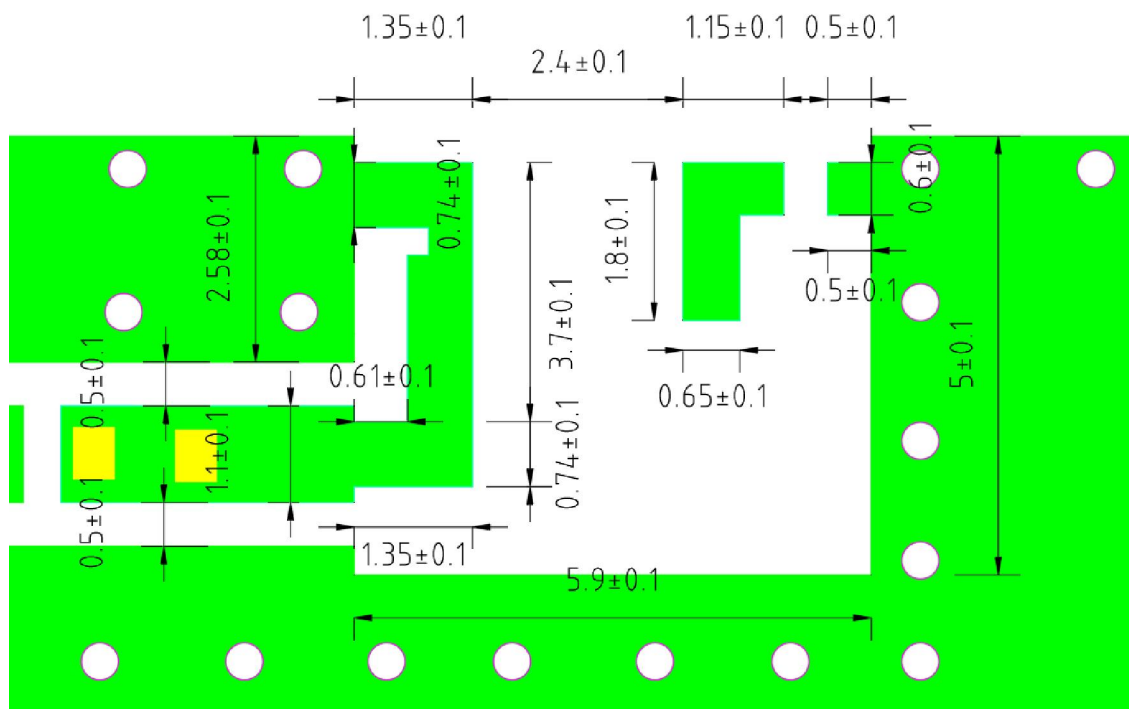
MAN2450C32 PCB Layout (Unit: mm)
